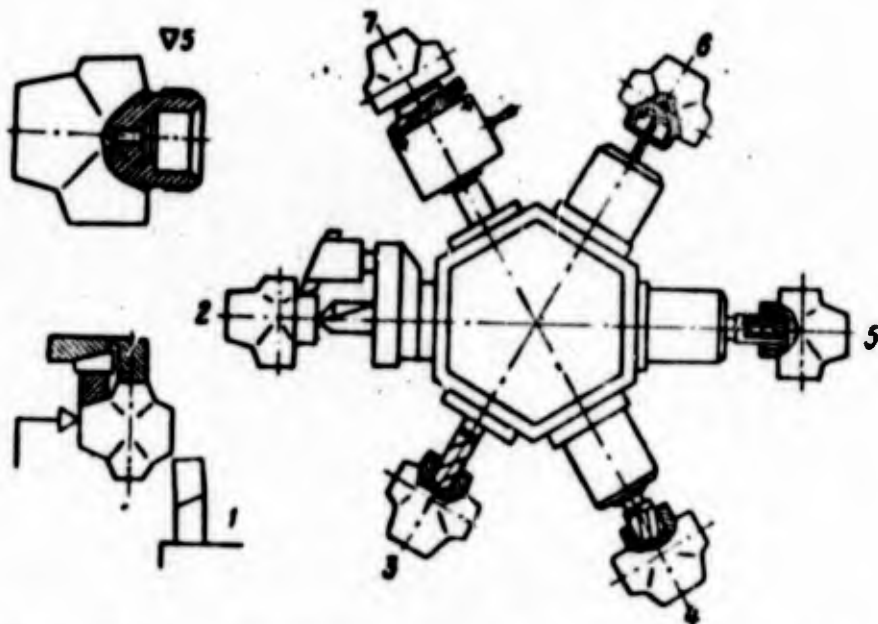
Working of high-pressure valve housing on machine of model 1338.
